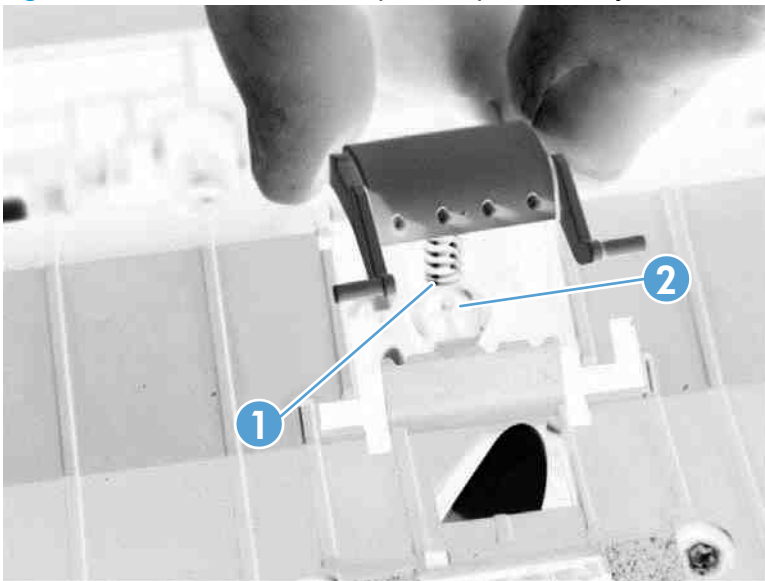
Remove the ADF separation pad assembly (3 of 3)
